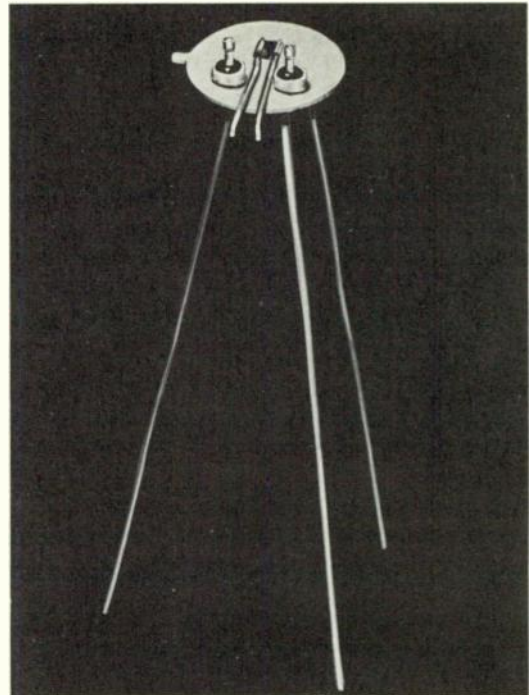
General electric silicon rectifier in which two .010 inch diameter aluminum wires are ultrasonically welded to silicon.
